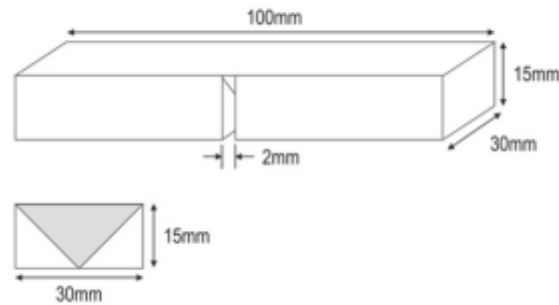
Schematic diagram to show the sample arrangement for the work of fracture tests carried out at the Barlborough R&D center.
